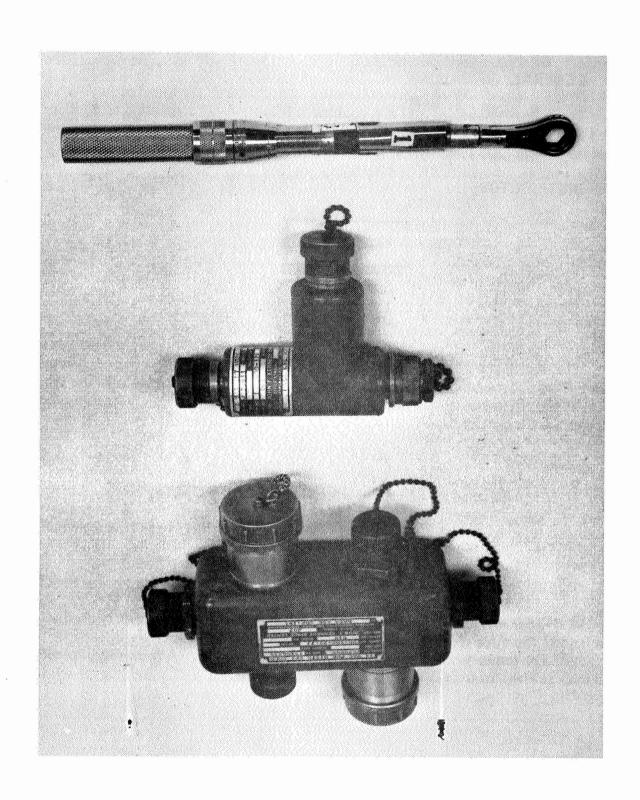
Distributor, Tee Adapter, and Torque Wrench
